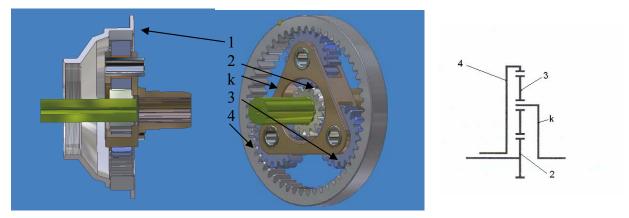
The main parts of a simple planetary gear gearbox housing (1); sun gear (2); planetary carrier (k); planet gear (3); ring gear (4)
